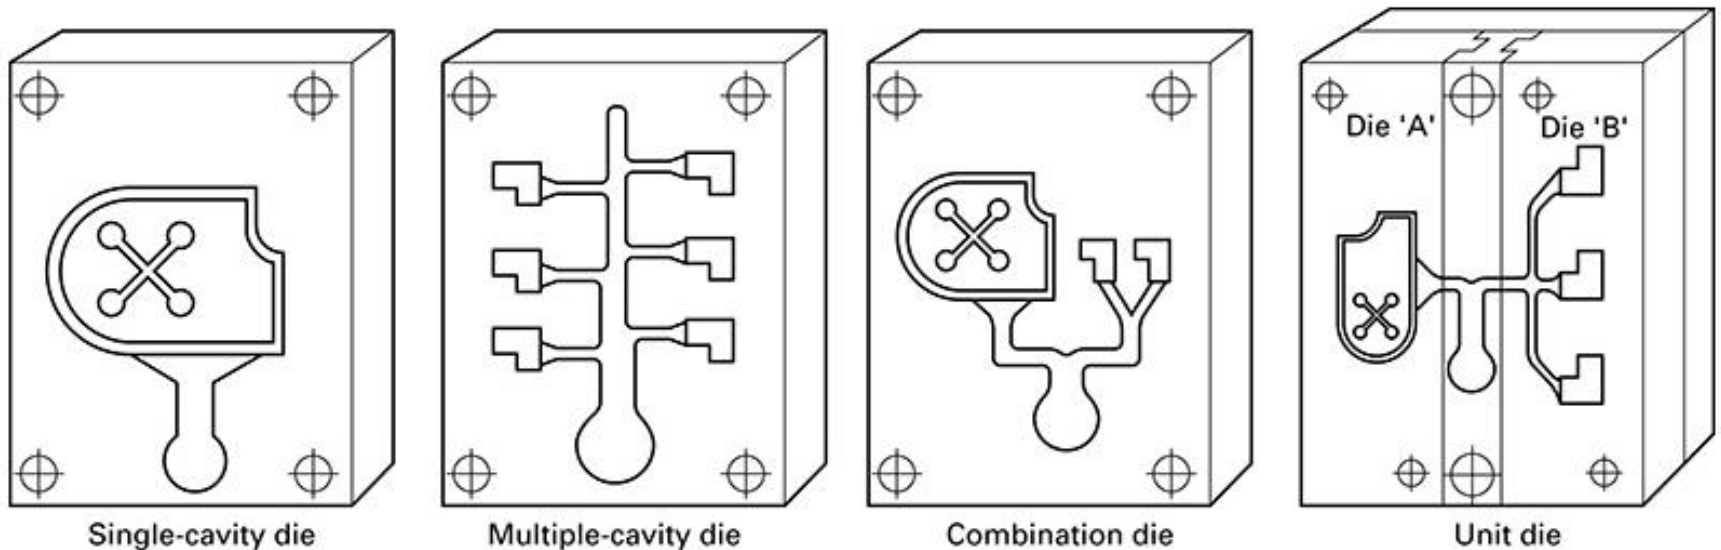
Various types of die-casting dies. (Courtesy of American Die Casting Institute, Inc., Des Plaines, IL.)
